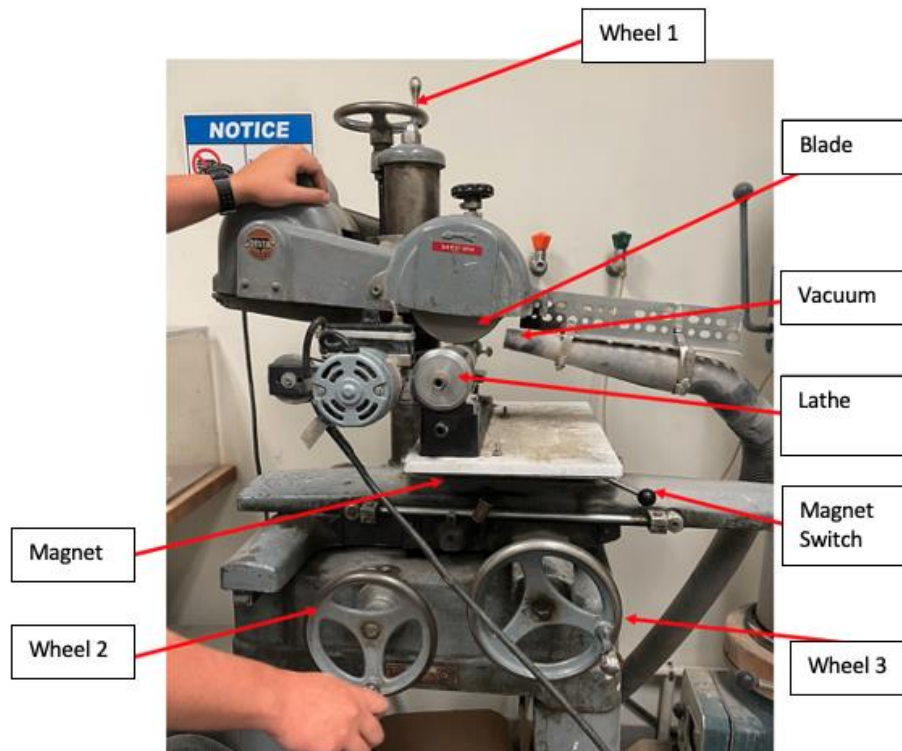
Image of end grinder and lathe components used for reducing sample diameters
